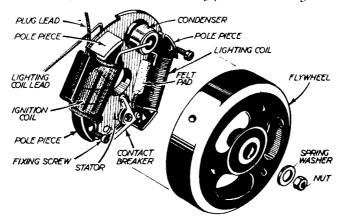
THE FLYWHEEL MAGNETO-GENERATOR IN DETAIL.
